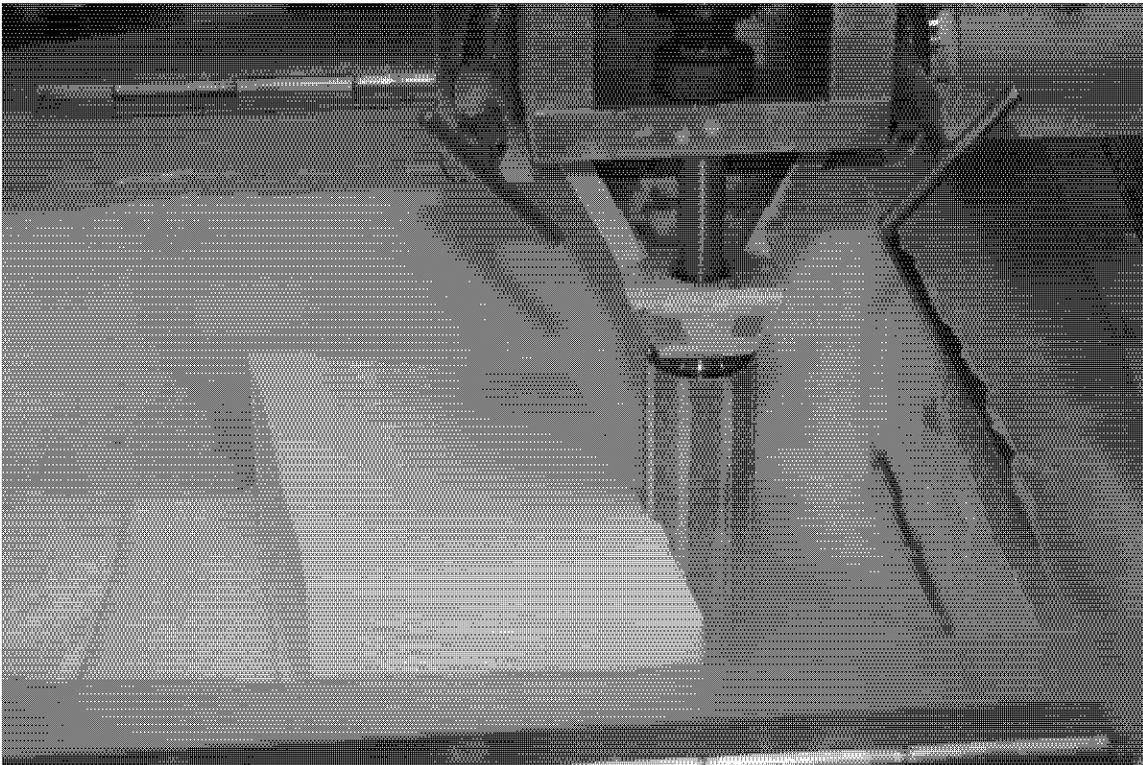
Detail view of cutting tool shaping a tile on the Contour Mill Machine, March 10, 2010.
